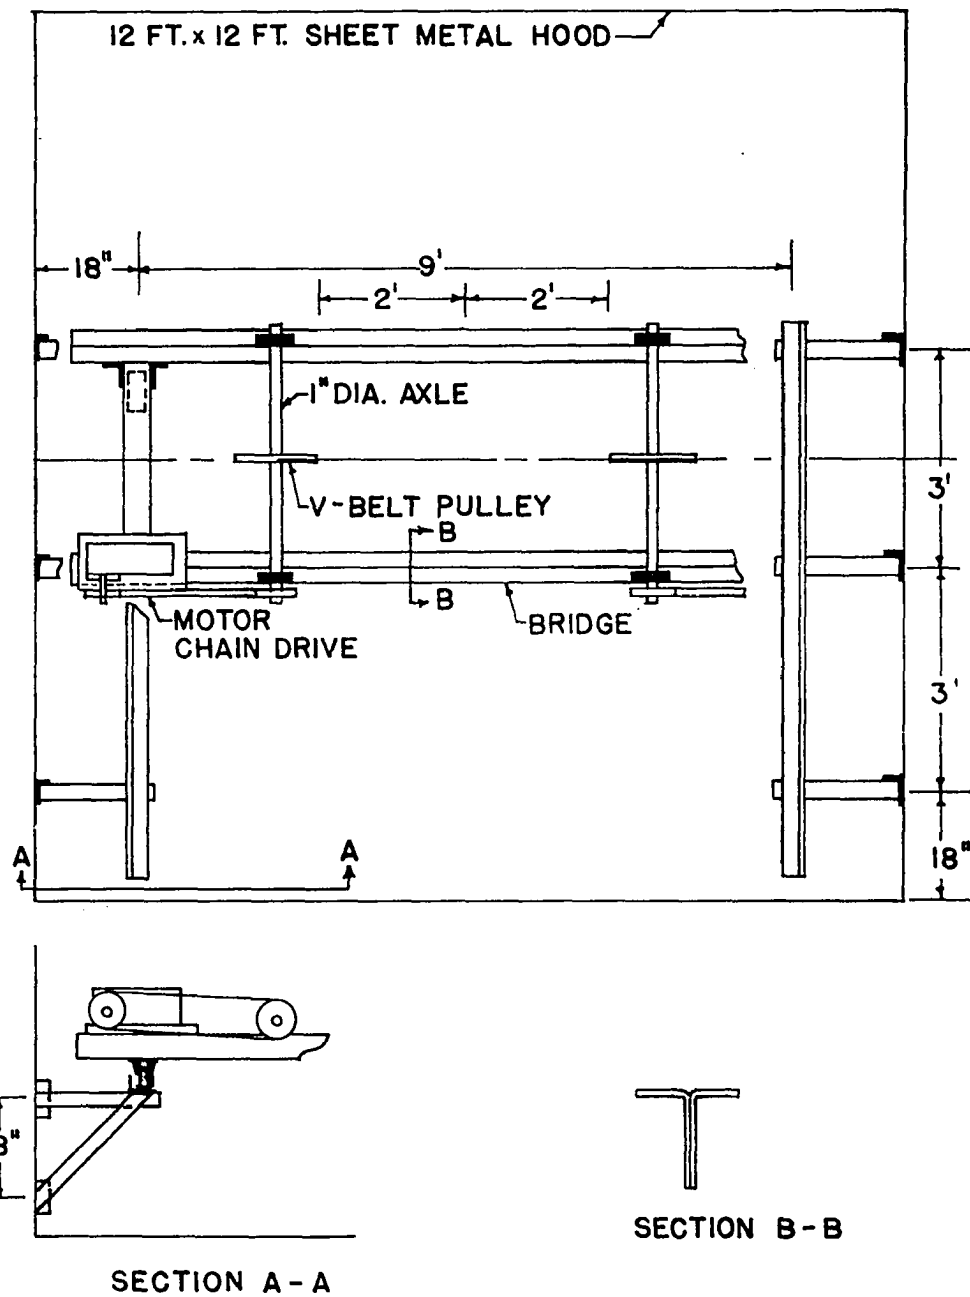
Lifting and Support Mechanism for Lead Tube Assembly.
